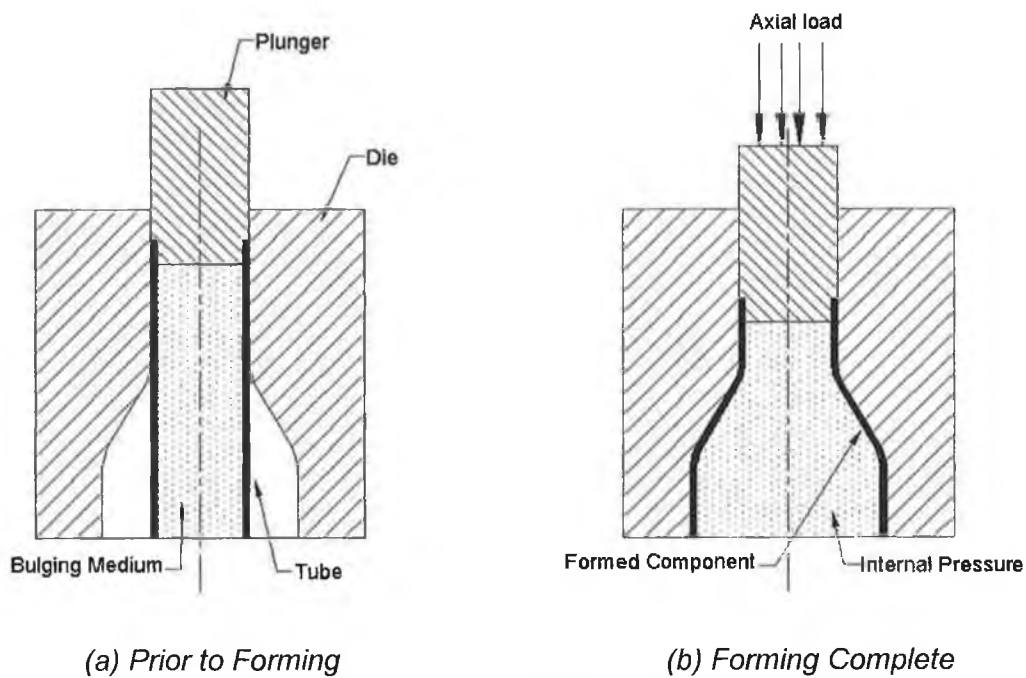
Arrangement for Axisymmetric Bulge Forming Using a Urethane Rod
